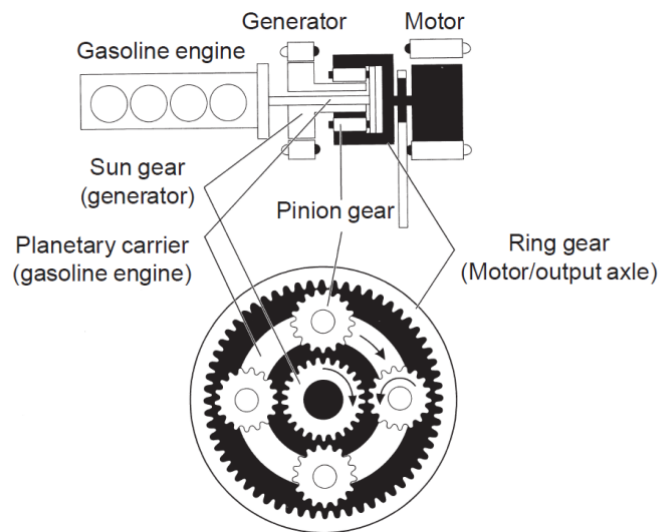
Epicyclic (planetary) gear set in a power split drivetrain [20]
